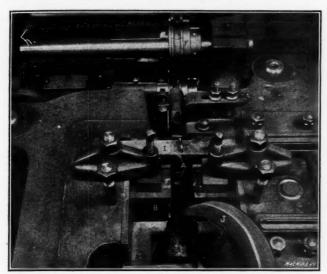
View looking down into Die Space of Ajax Continuous-motion Bolt and Rivet Header
